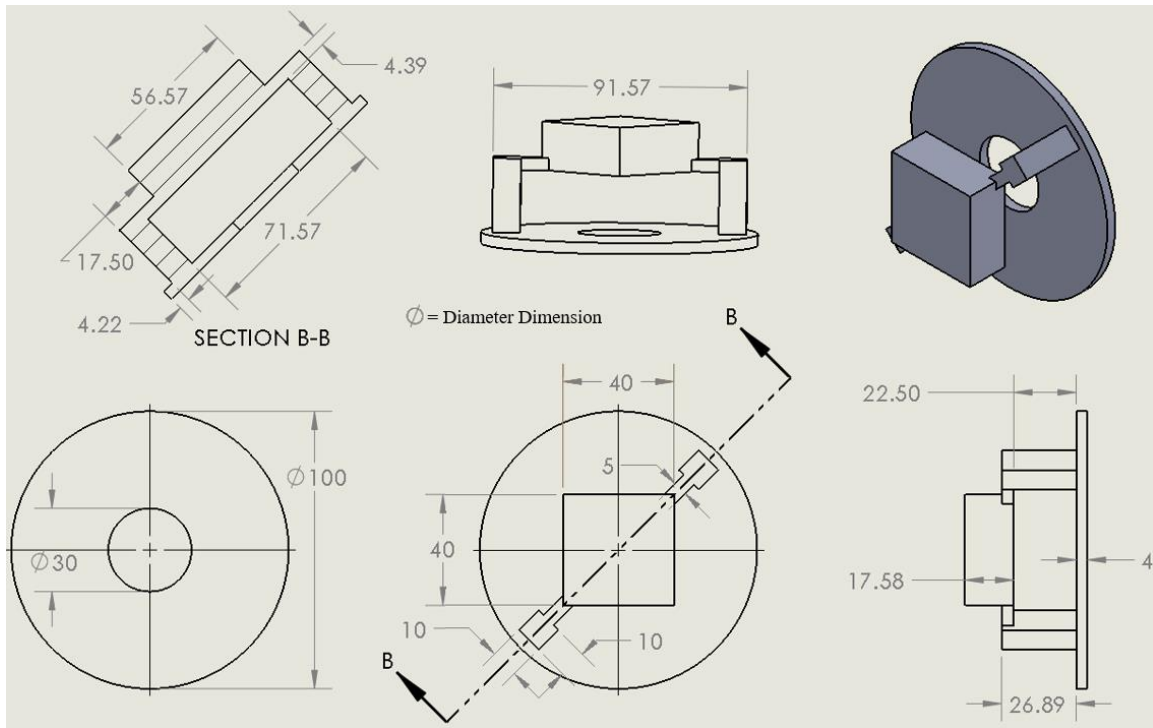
Drawing of Flat Surface Double Cavity FPI Sensor
